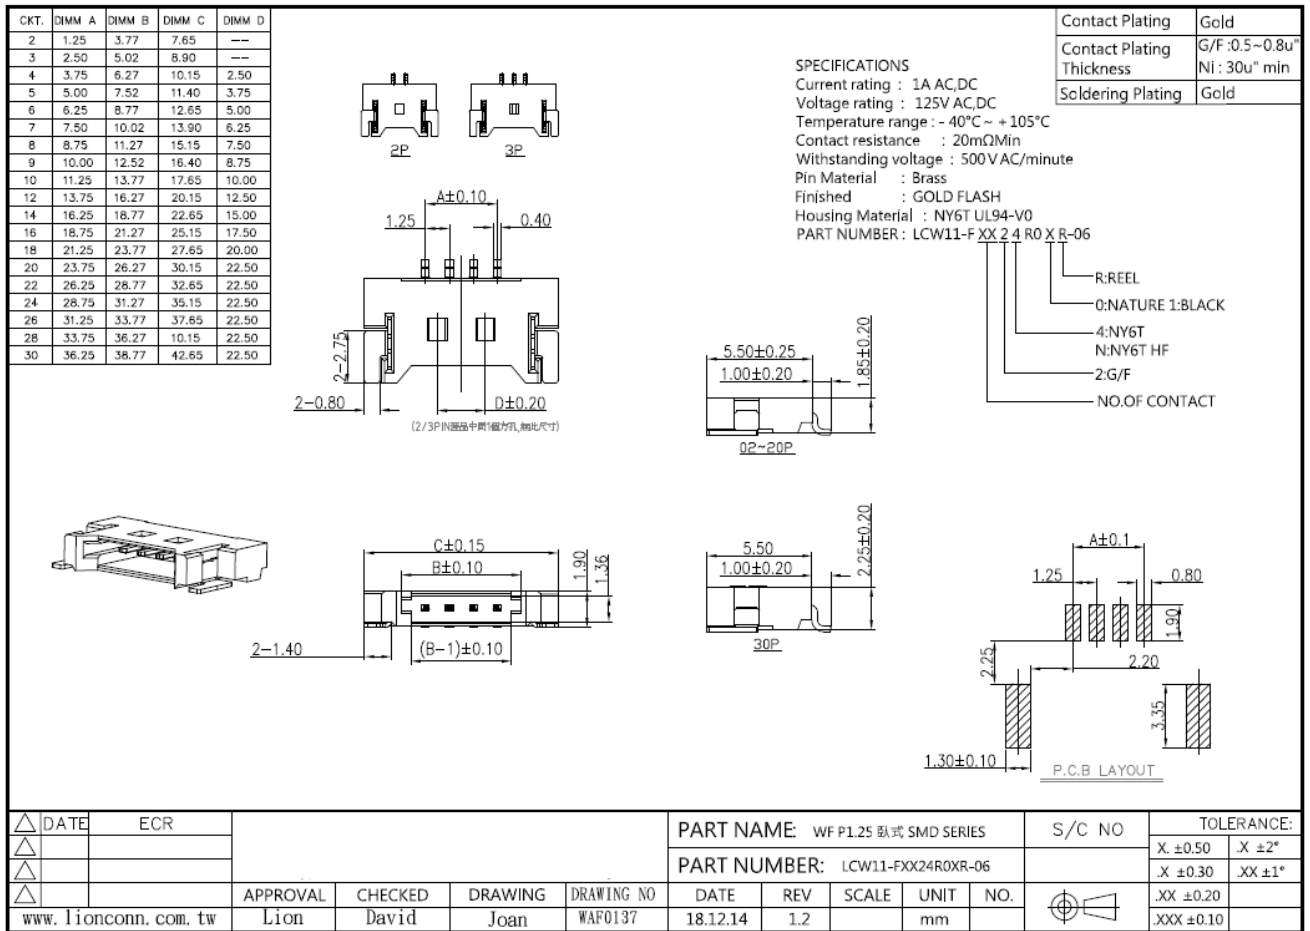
Wire to Board SMD 1*3P Connector Drawing (CN1-CN4)
